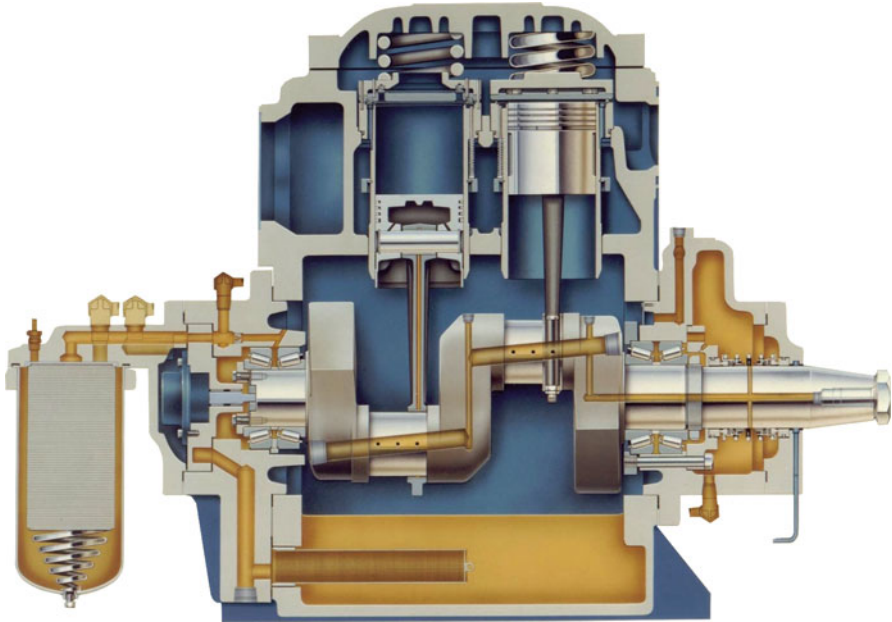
Cross section of a reciprocating compressor (courtesy of Vilter Manufacturing, Sidney, OH)
